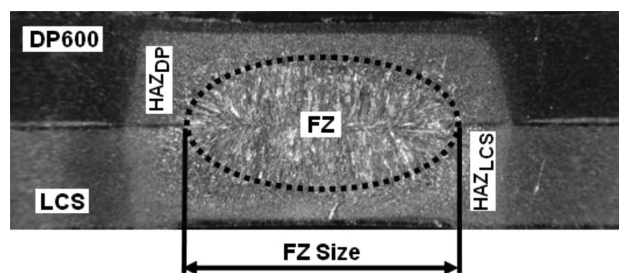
Macrostructure of a weld of DP600 and low-carbon steel: FZ size is defined as the width of the weld nugget at the sheet/sheet interface in the longitudinal direction
